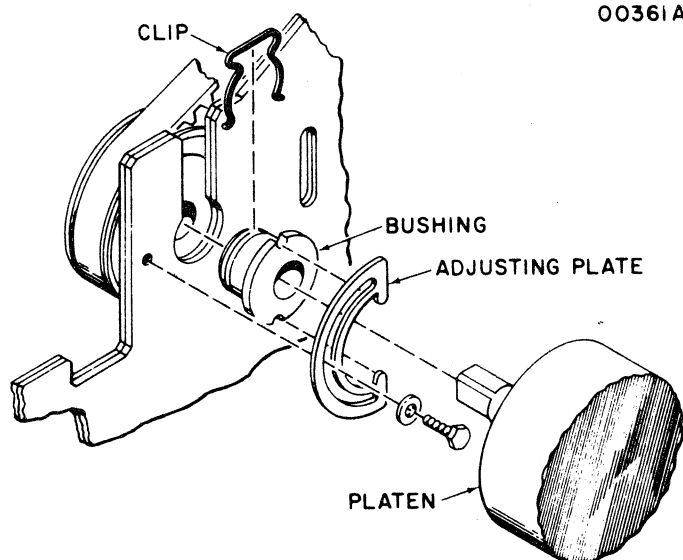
PLATEN ASSEMBLY ADJUSTMENTS
